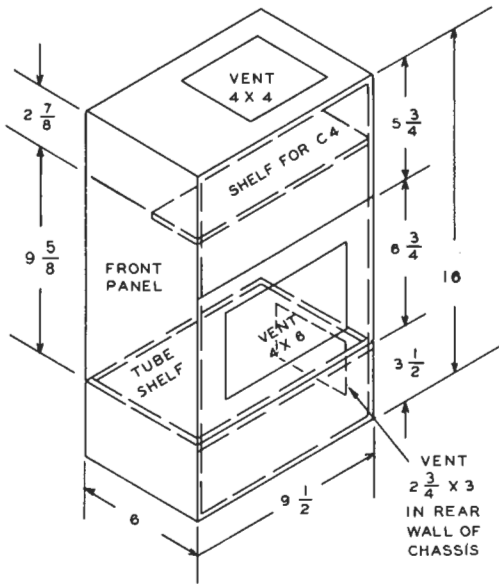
CABINET DRAWING for the mobile linear amplifier. This cabinet was fabricated from $\frac{1}{8}$ -inch thick sheet aluminum, with flanges for side shields.
